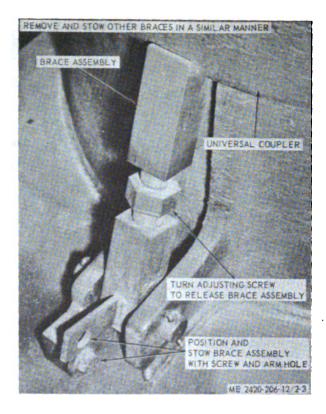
Tractor universal coupler brace, removal and stowage.
